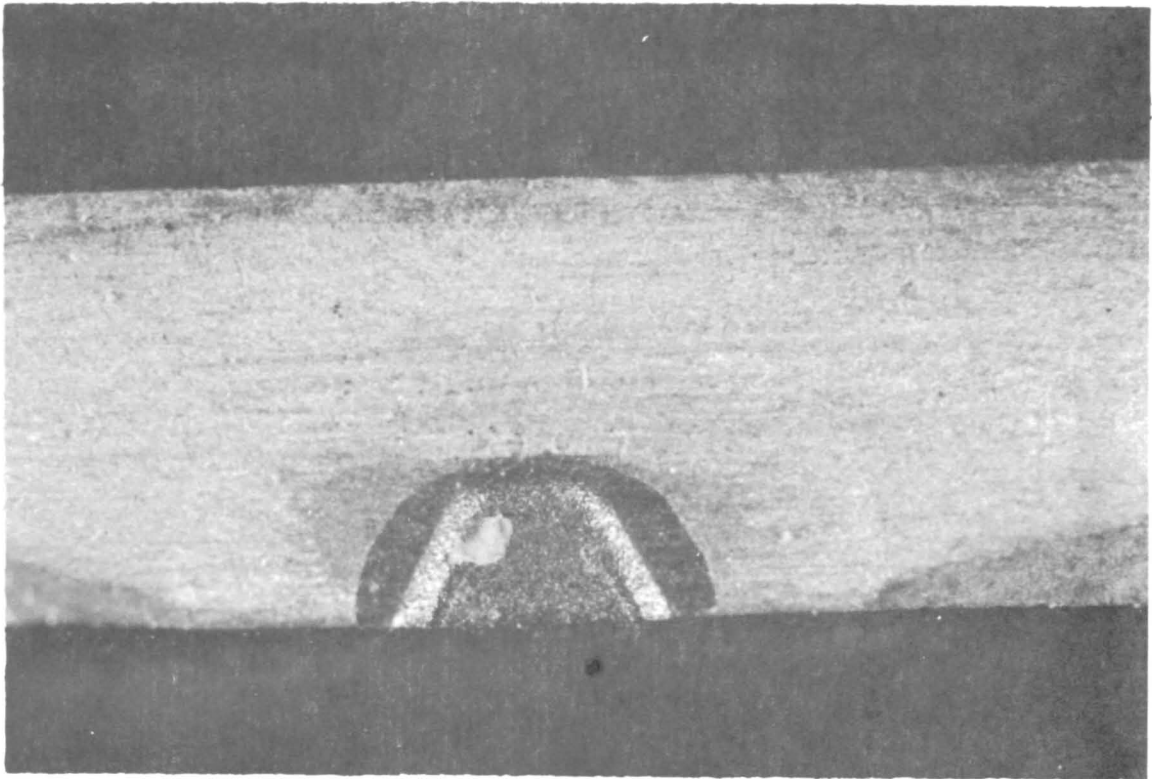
Fractograph and flaw map of specimen TOL-8.
